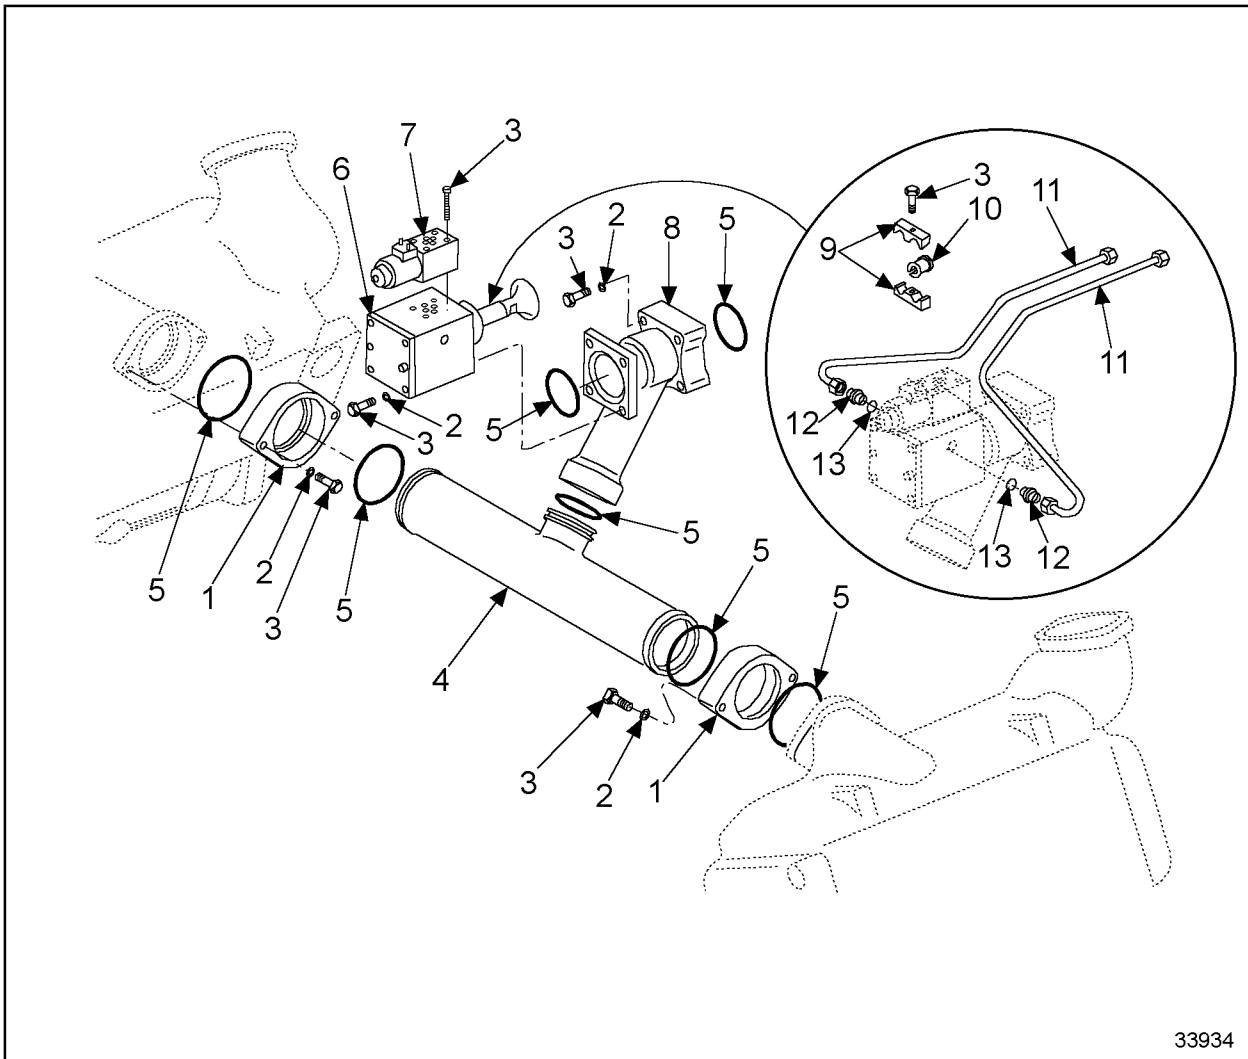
Removing Bolt and Washer from Turbocharger Actuator Control Solenoid Valve (Marine)
